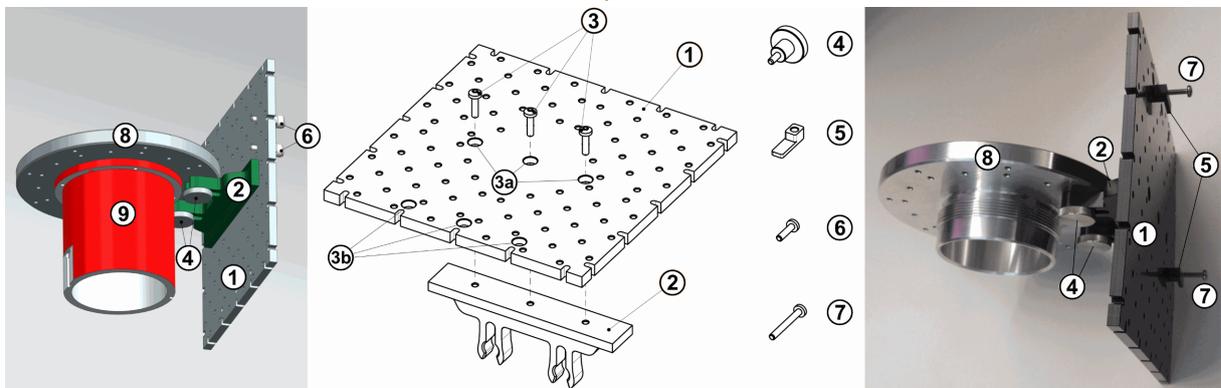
Holder set for carrying a printed circuit board (PCB) in addition to a DUT
